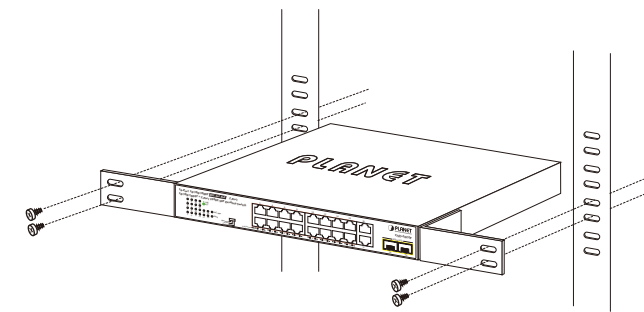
Mounting the 802.3at PoE+ Switch in a Rack
